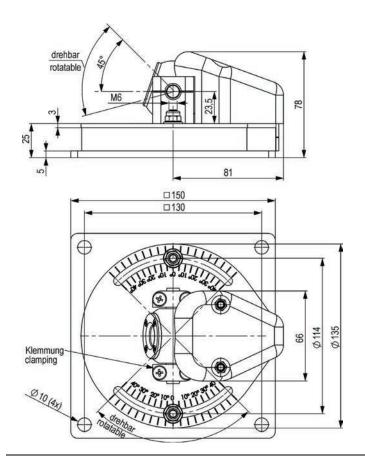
Dimensioned drawing ball head sensor Type NOS-V20BS
